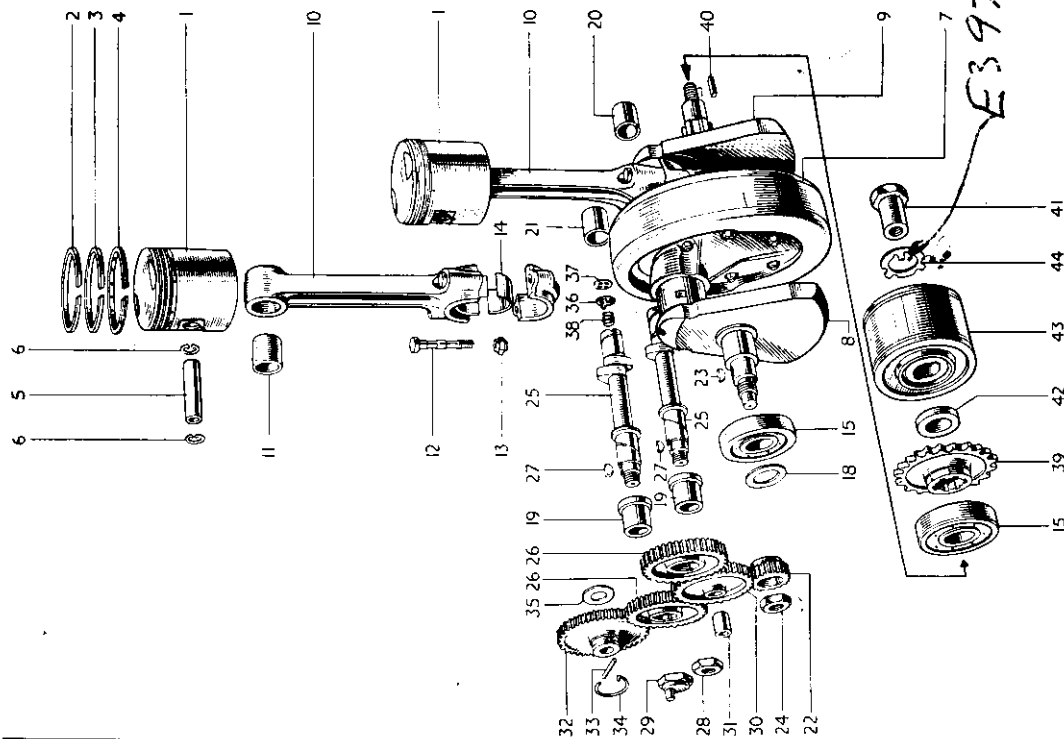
CRANKSHAFT, CONNECTING RODS, PISTONS, TIMING GEAR, etc.
